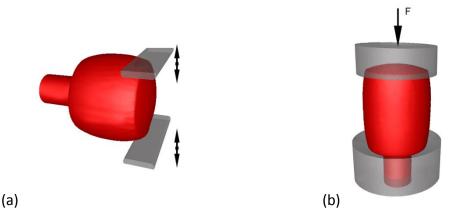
Basic operations of hammer forging (a) fullering (b) upsetting
